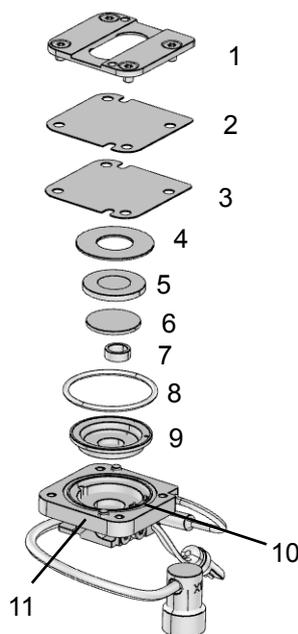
Exploded-view drawing of the battery sample holder (reflection)
